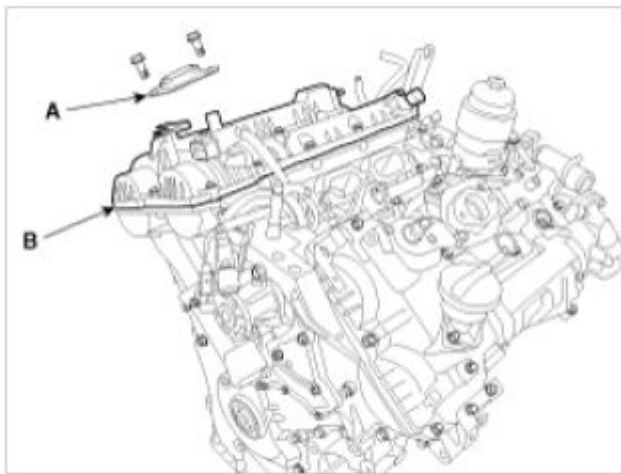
Identifying CVVT Oil Control Valve Cap And RH Cylinder Head Cover
